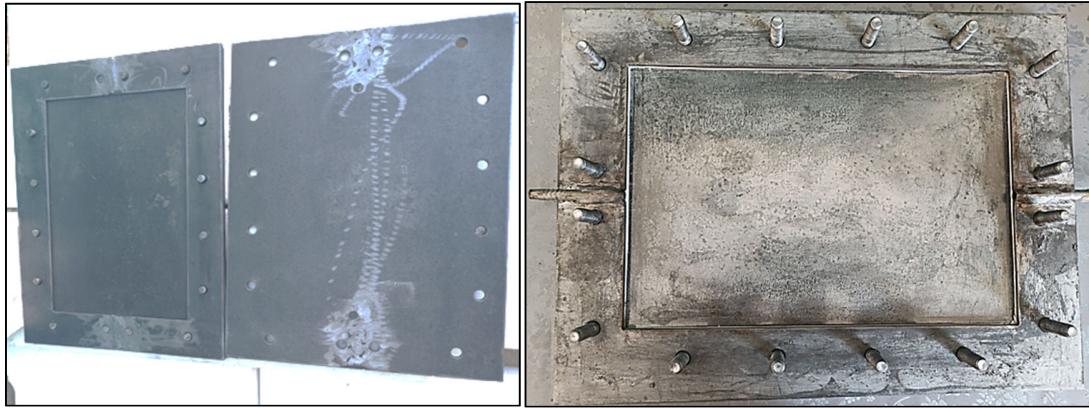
Mold dimensions 300 mm x 250 mm x 4 mm.
